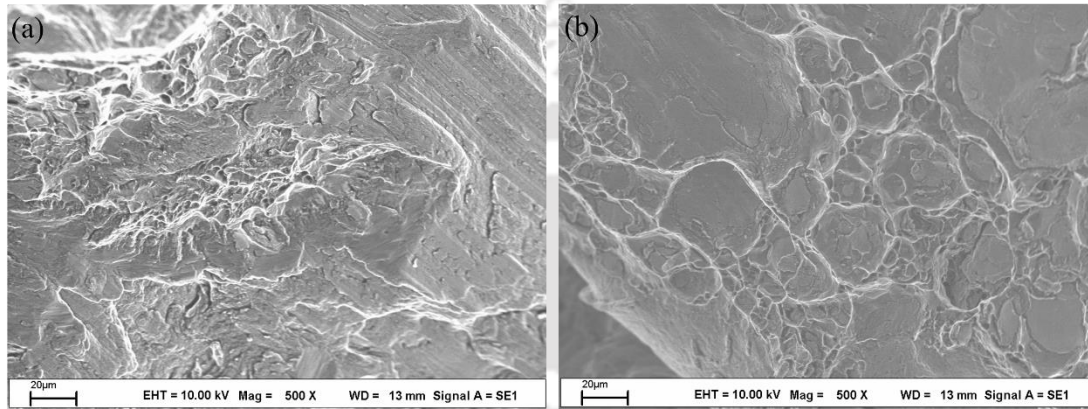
Fracture surface morphologies of joints at different welding condition: (a) without preheating and (b) with preheating of 55 A at 2 mm of tool offset, 815 rpm and 98 mm/min welding speed.
